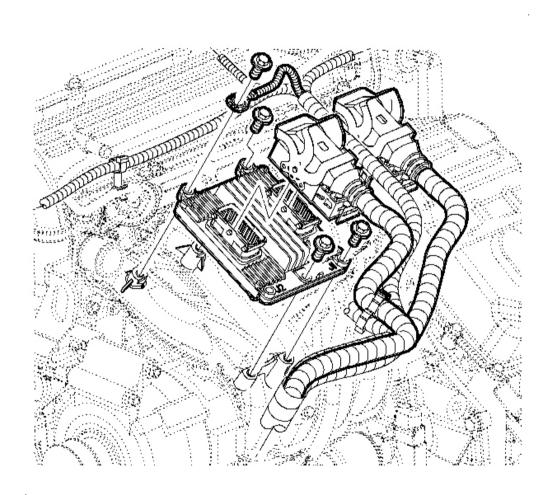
View Of ECM Bolts Courtesy of GENERAL MOTORS CORP.
